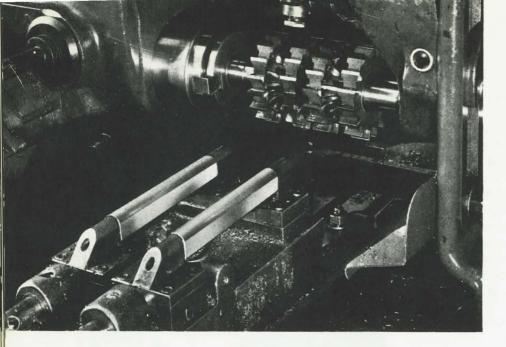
Two Slides being Straddle-milled to Form a Curved Top Surface and Straight Sides. Each Slide is Held by Pins which Fit into the Barrel-bushing Hole, the Recoil-spring Hole, and the Centered Hole at the Rear End
